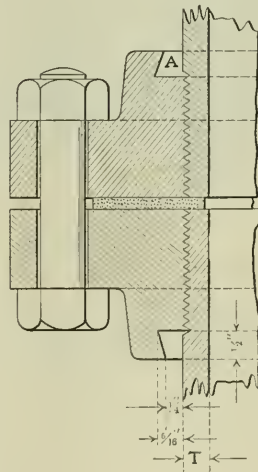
SCREWED FLANGES WITH CALKING RECESS
